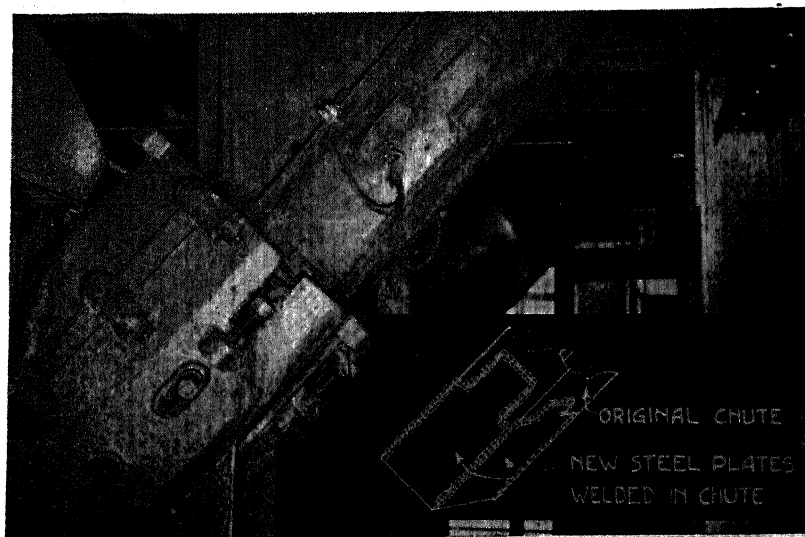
When log chipper chutes are broken due to fatigue from severe and constant vibration, a new lower section, cut from high tensile steel, is welded in as shown in the sketch. The irregular line of the weld is claimed to be stronger than a straight cut.
